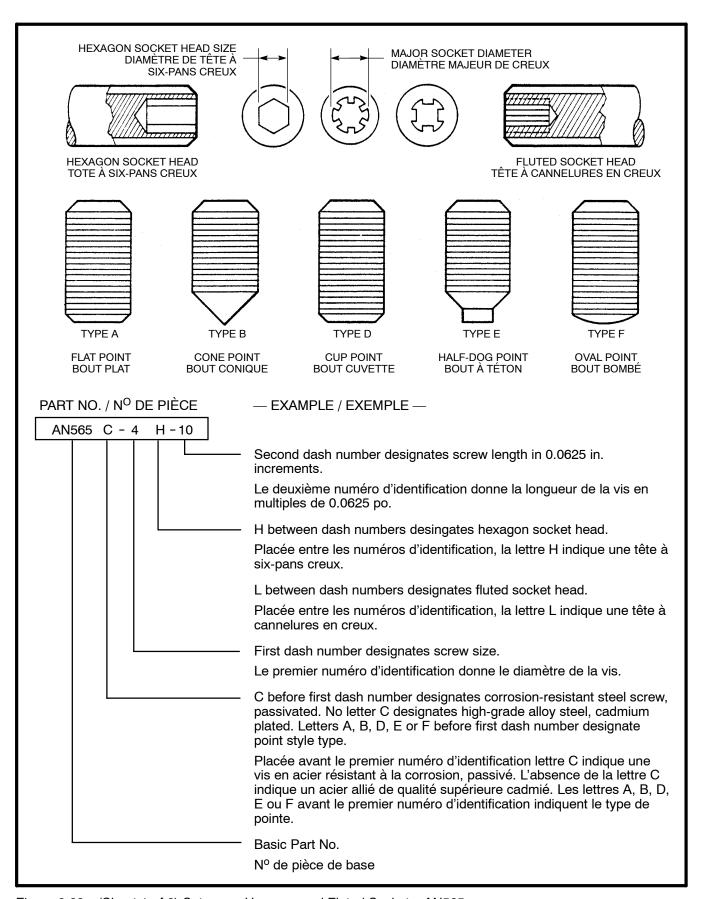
(Sheet 1 of 2) Setscrew, Hexagon and Fluted Sockets, AN565 Figure 6-28 (feuille 1 de 2) Vis de blocage à six-pans creux et cannelures, AN565
